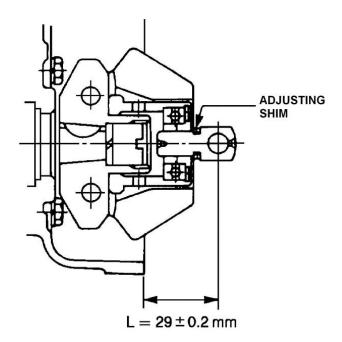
Shifter and Sleeve Assembly Setting Dimension - Sectional View
